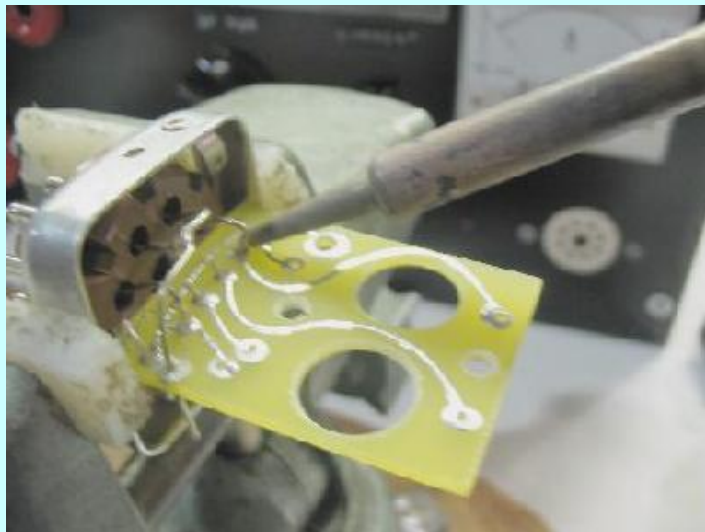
Illustrating the wire 1-2 connection. First, make a right angle to the right with the buss wire. Then, bend the wire toward the top hole of the pc board. This lead shares a connection with wire 4, which comes in from the back and gets inserted into the lower of the two holes.
